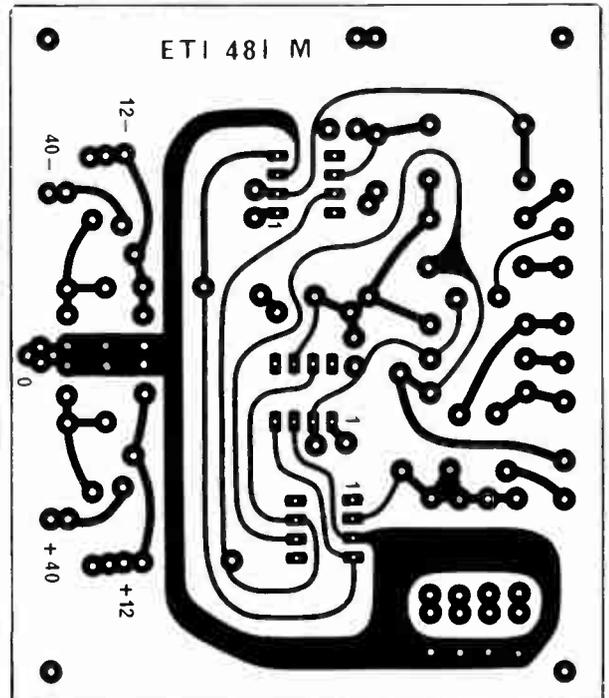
Printed circuit layout. Full size 92 x 78 mm.
